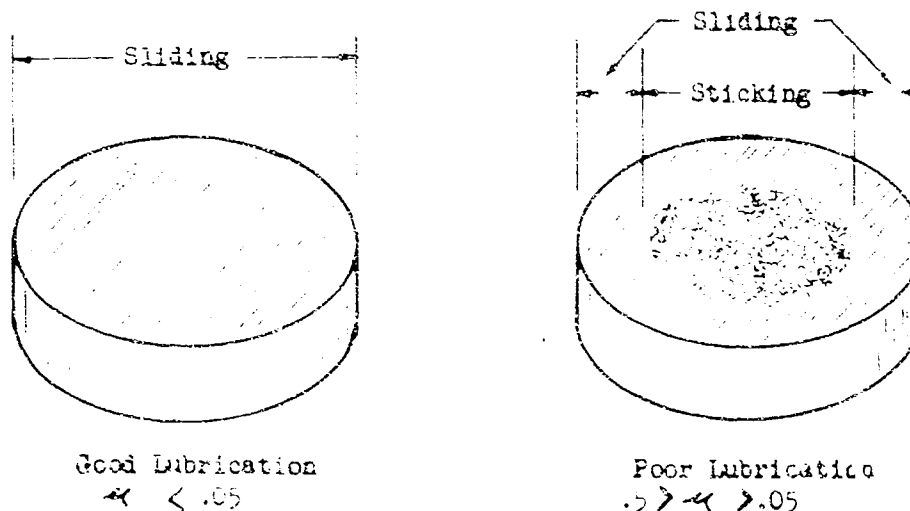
SURFACE APPEARANCE AFTER FORGING
